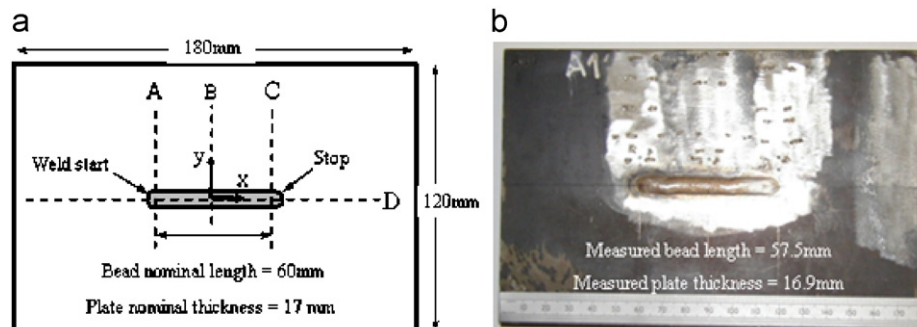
(a) Sketch of NET bead-on-plate weld design, (b) photograph of specimen A11.
